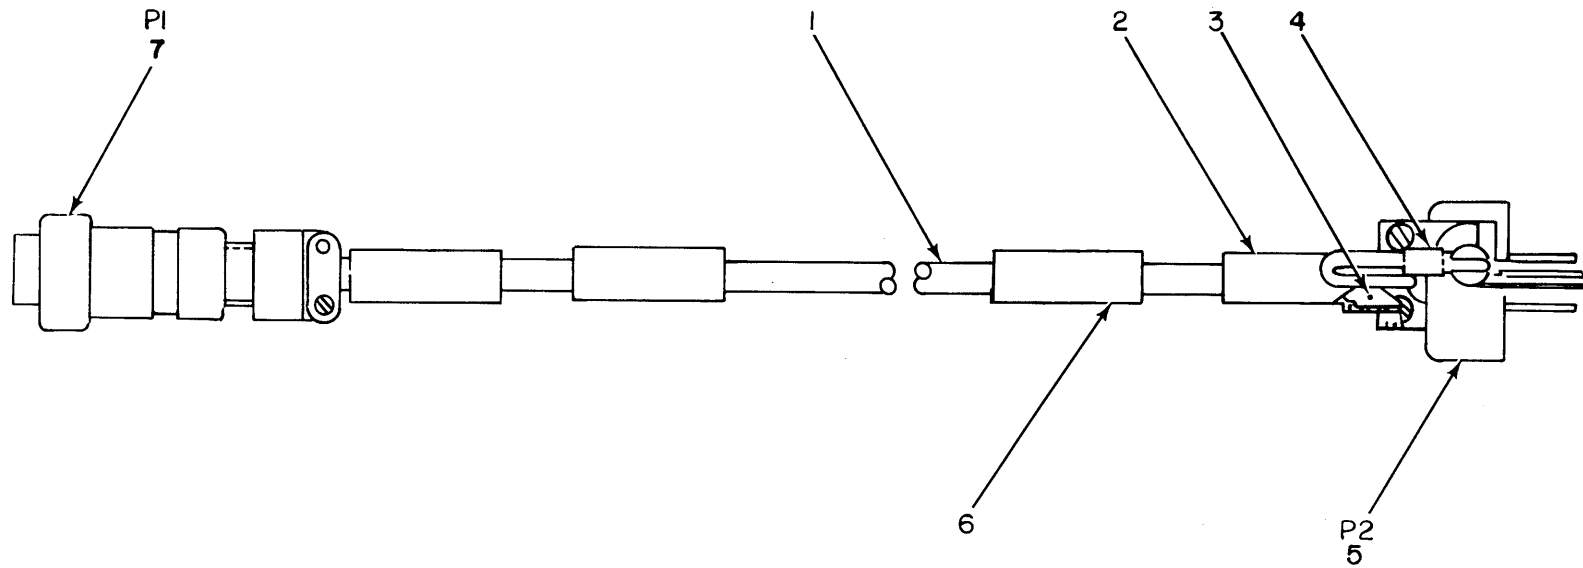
Cable Assembly, Special Purpose, Electrical CX-10830/FGC.
